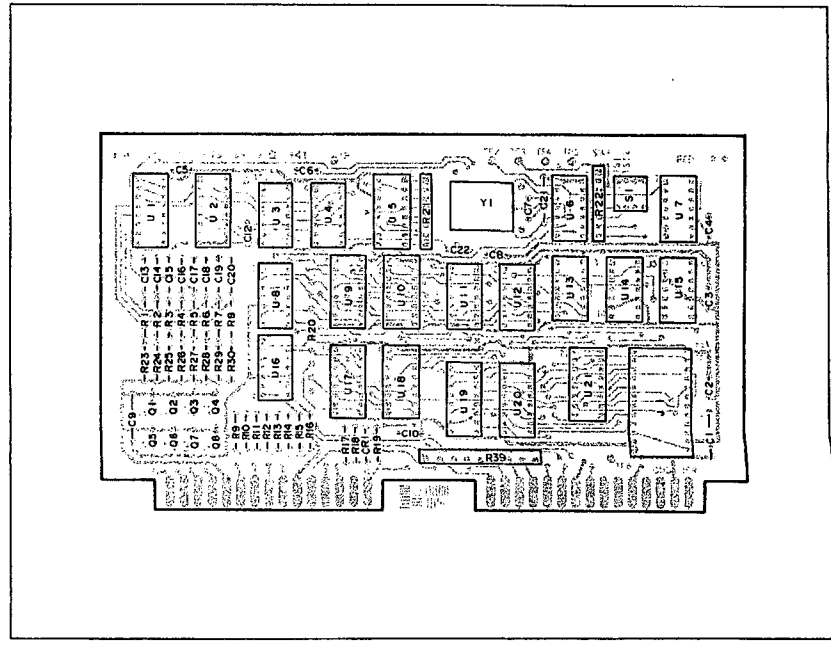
A22 Display Control & RAM Board Assembly Component Locations.
